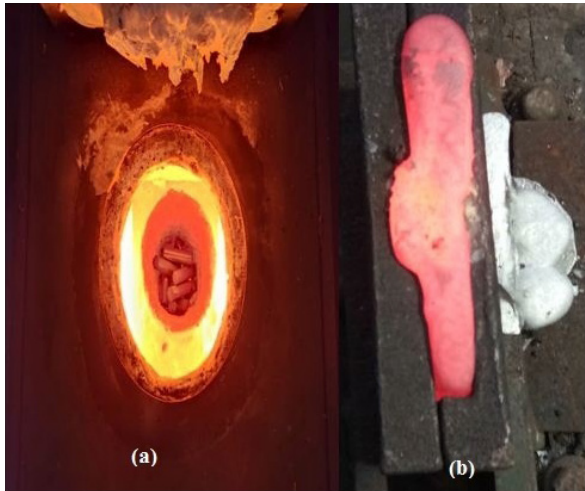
Friction stir process; a) casting furnace, and b) casting die with molten CMC
